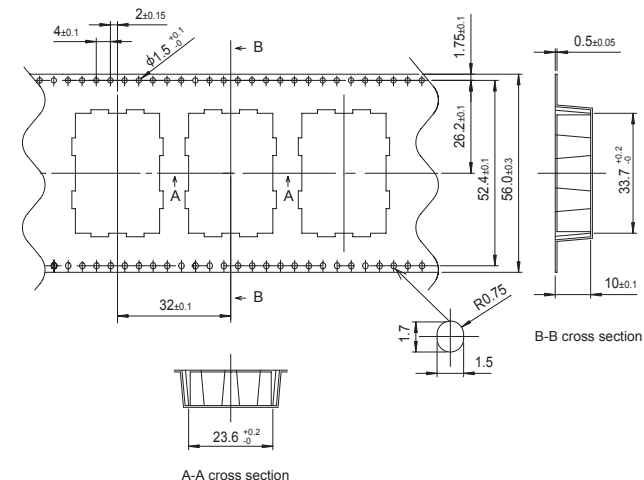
Taping dimensions of BRFS50/50L/60 · BRDS60
